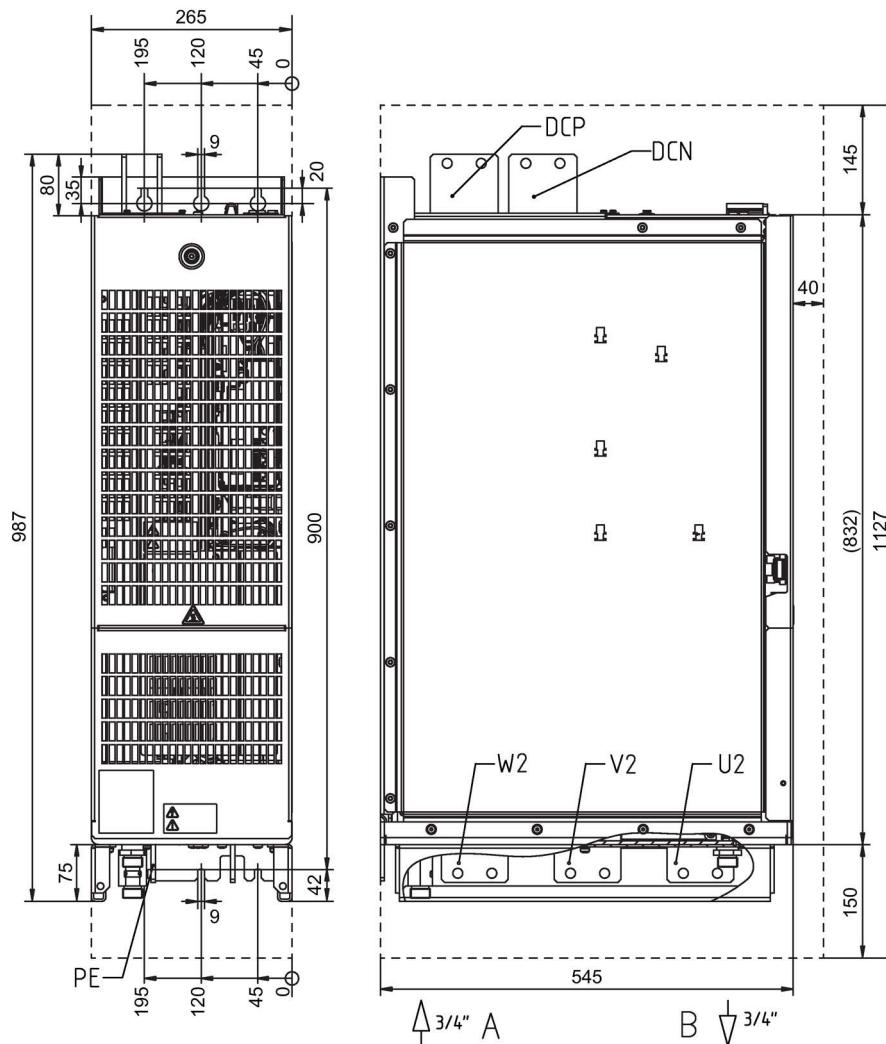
Dimension drawing Motor Module, frame size HXL. Front view, side view
